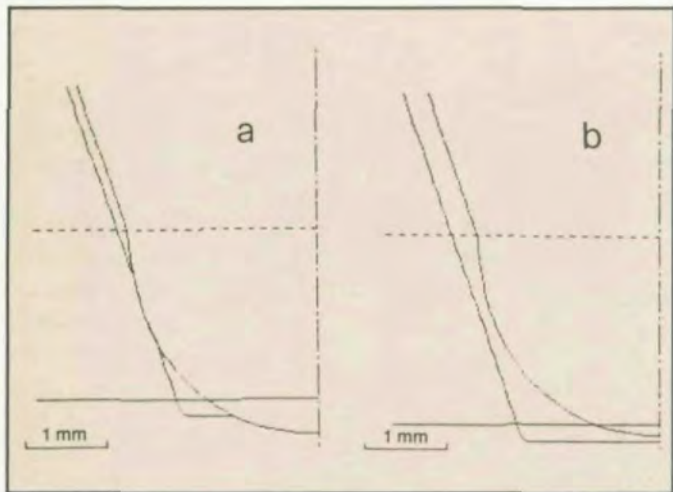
20° grinding of a gear similar to Fig. 7b: (a) undeformed; (b) badly deformed after heat treatment.
